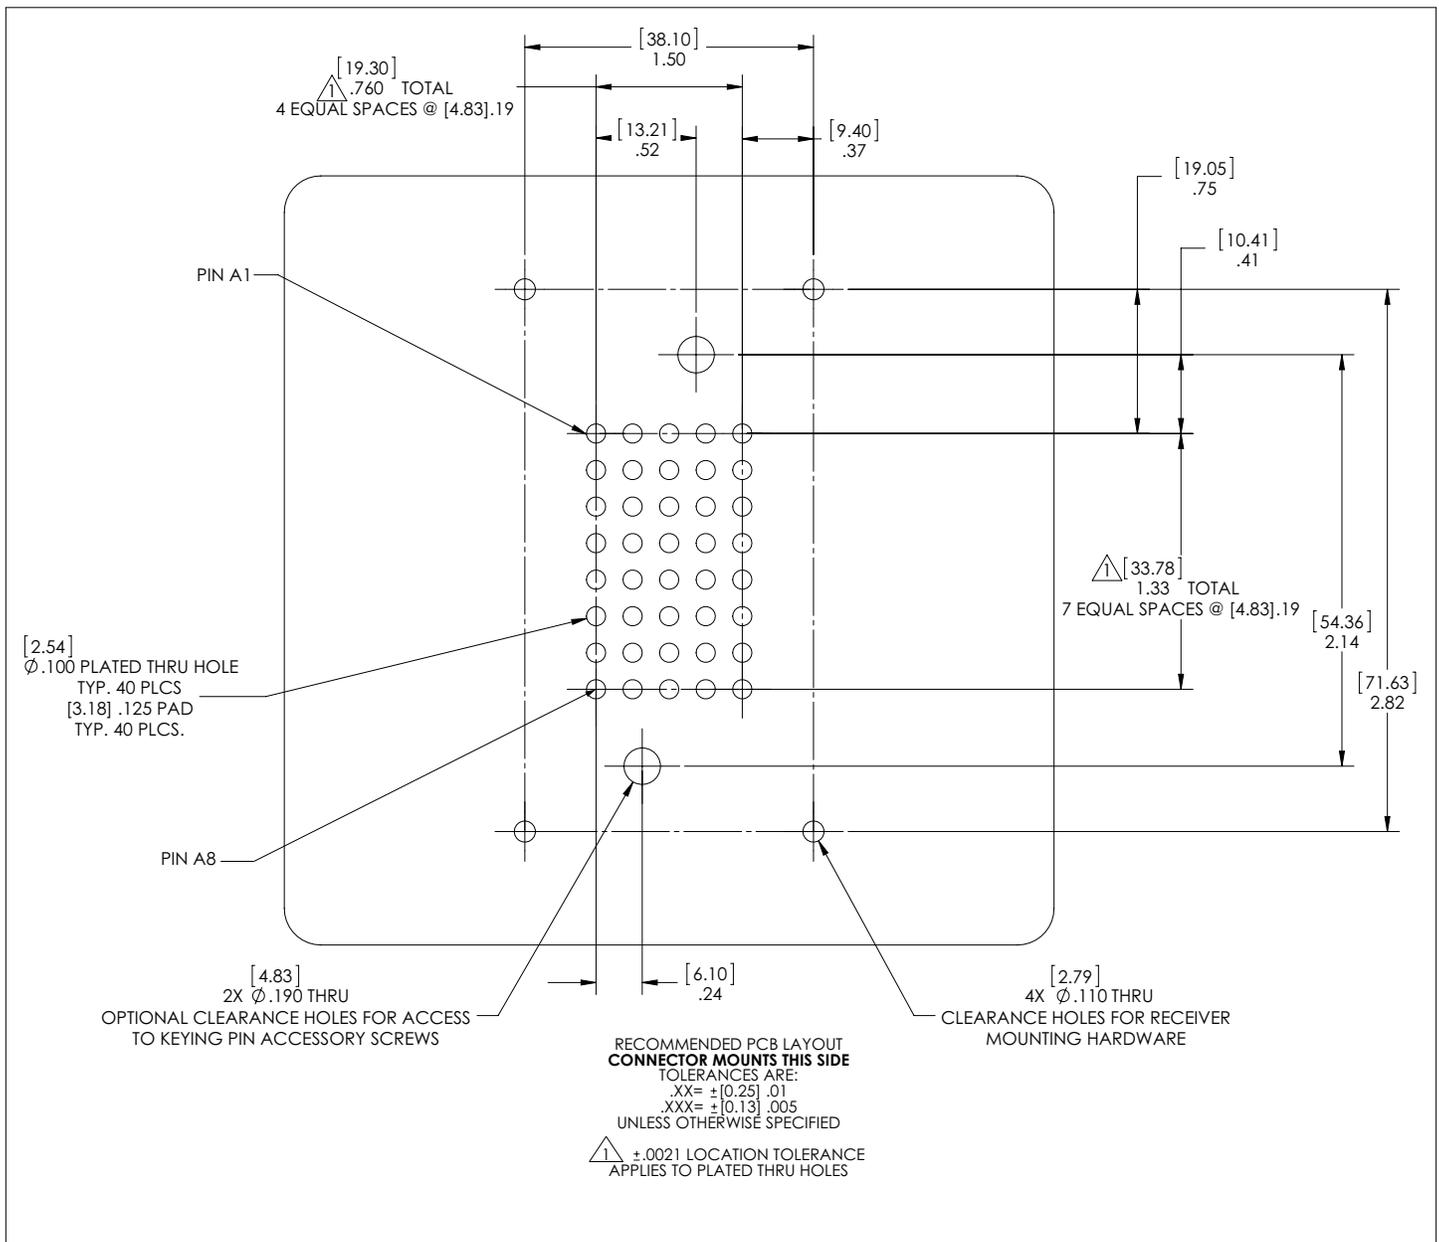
Figure A. PCB layout for the i1 Receiver, Part #310 128 101 loaded with a 510 160 105 module.
